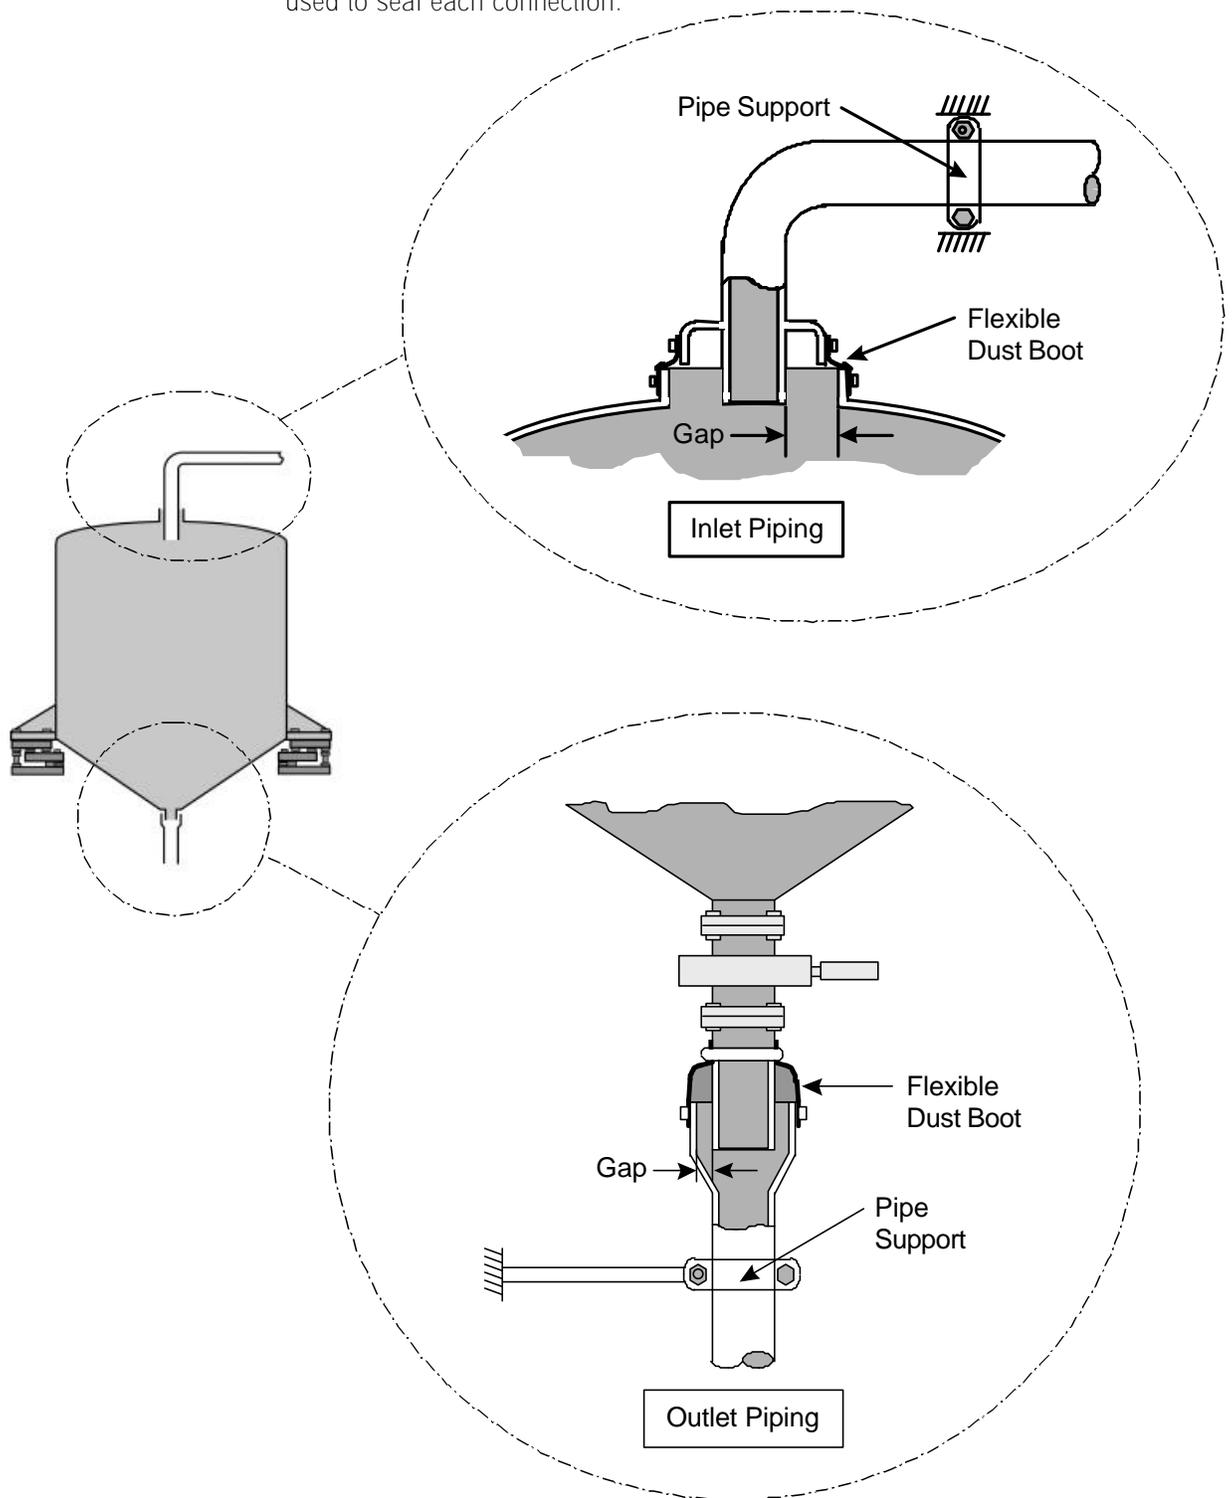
Recommended Flexible Connections Between Tank and Piping
